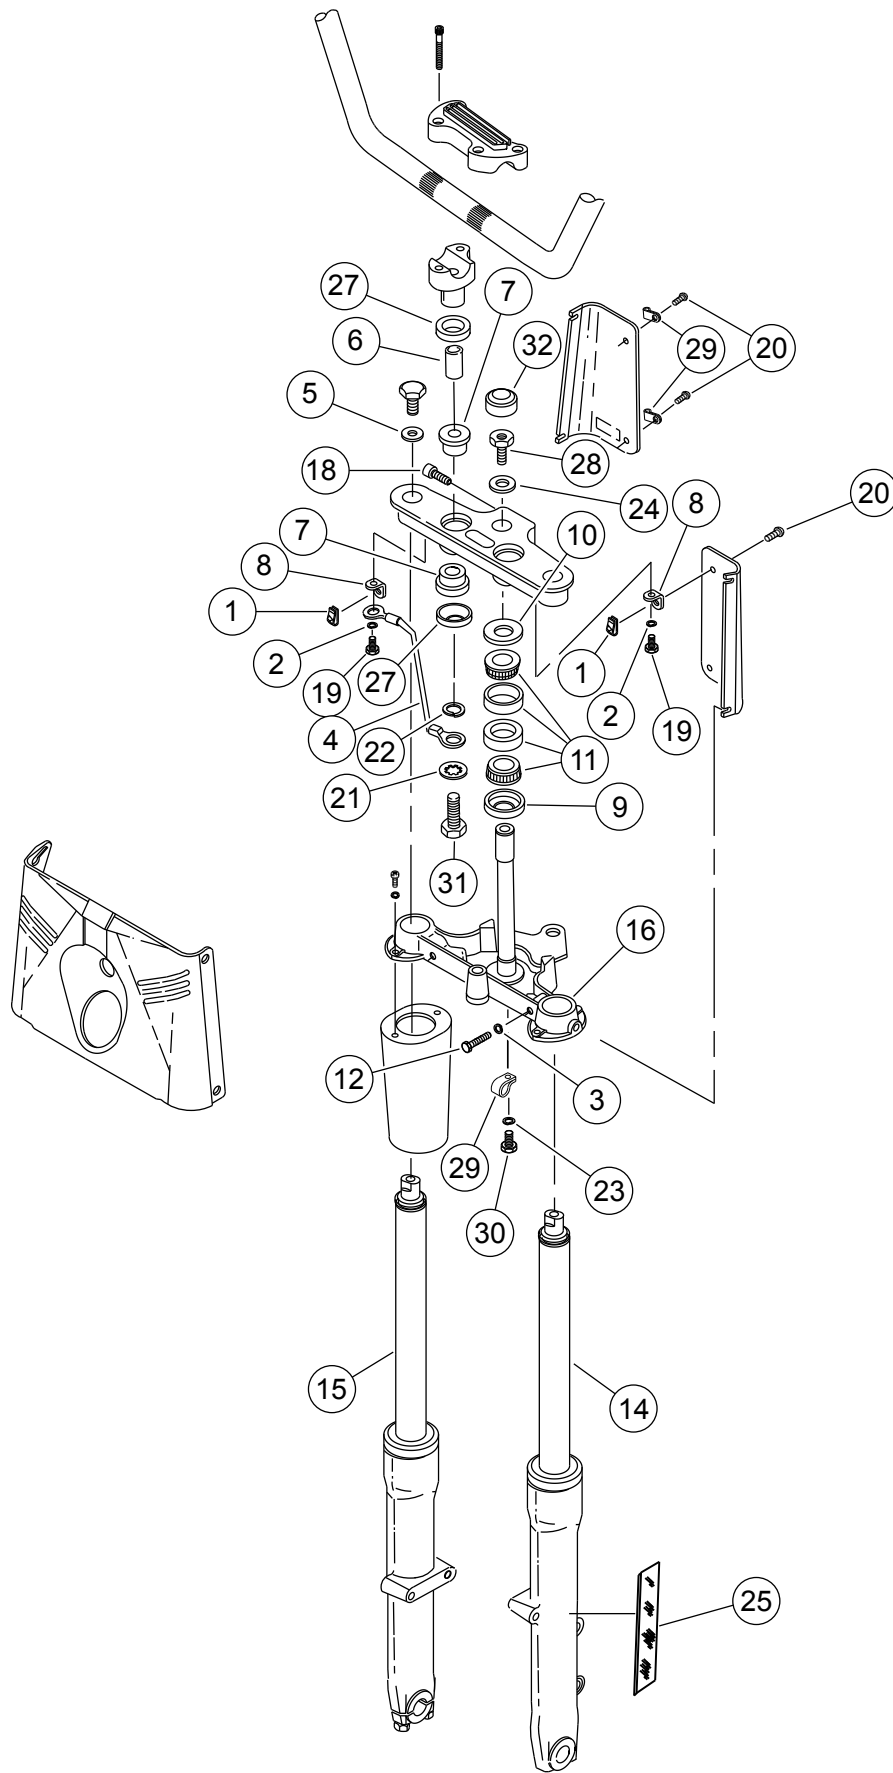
Service Parts: FLSTC and FLSRF Front End Kit
